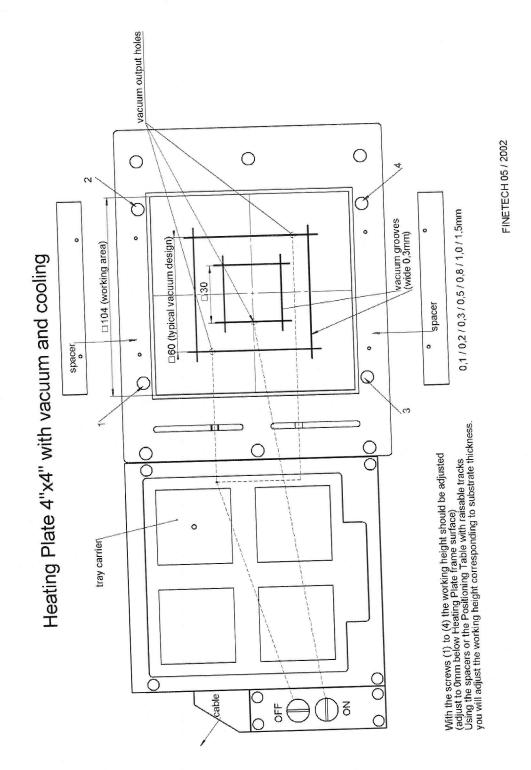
Heating Plate FA 5, with optional vacuum holder
